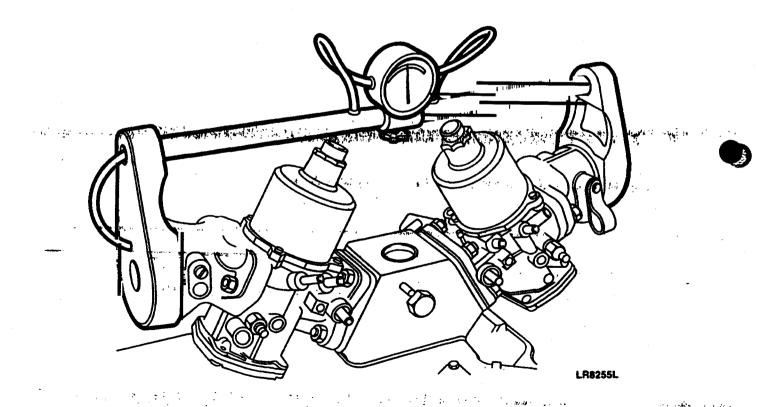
Tuning the carburetters using Balancer 605330 Chap 11-2 Oct 90 Page 16
